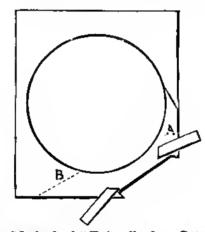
Method of "Tying" when Cutting several Thicknesses.
